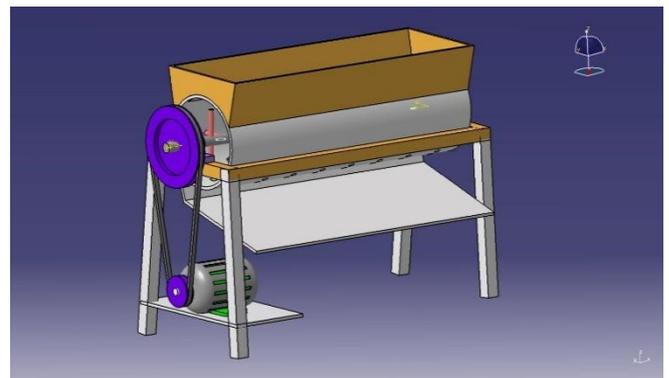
ASSEMBLY OF CORN SHELLING MACHINE
